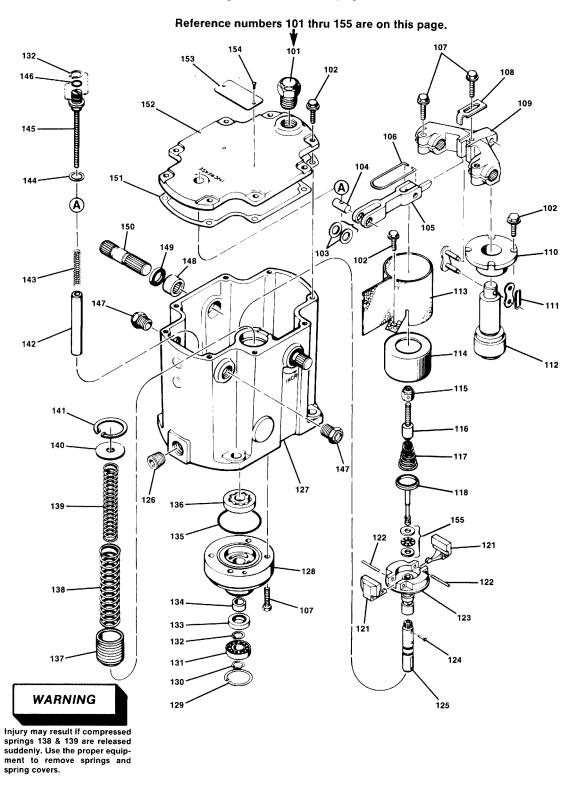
Parts for the TG-13 and -17 Governor. Die-cast Aluminum Case. Screw Speed Setting
